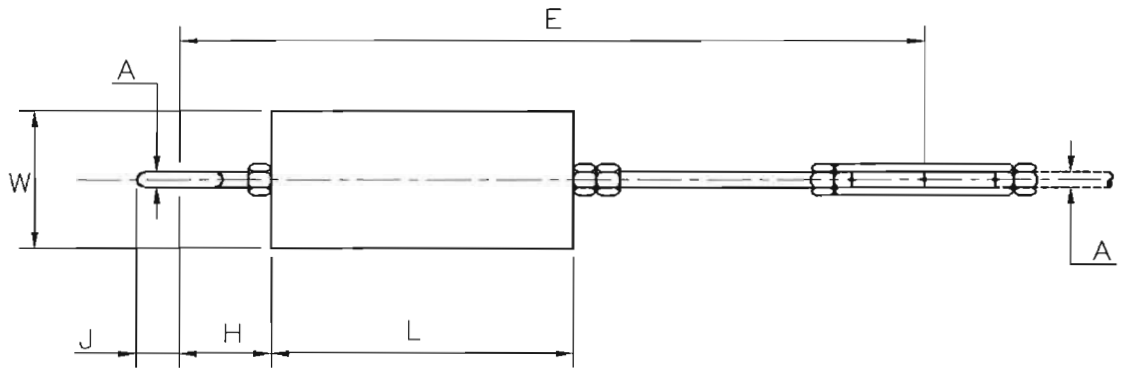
DOUBLE ADJUSTMENT SWAY BRACE ASSEMBLY
